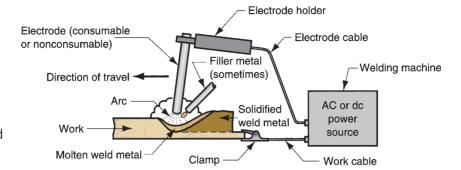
The basic configuration and electrical circuit of an arc-welding process.
